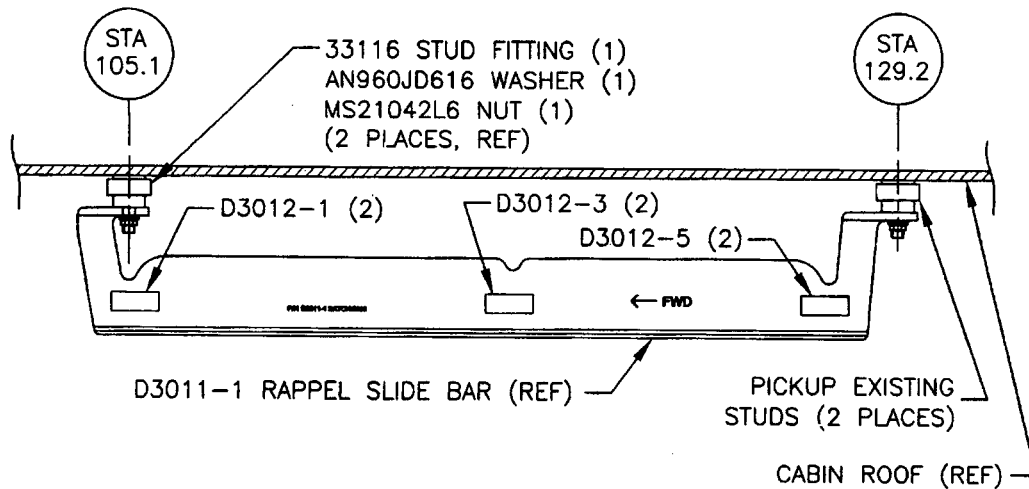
Installation of D205-523-043 Slide Bar Assembly
